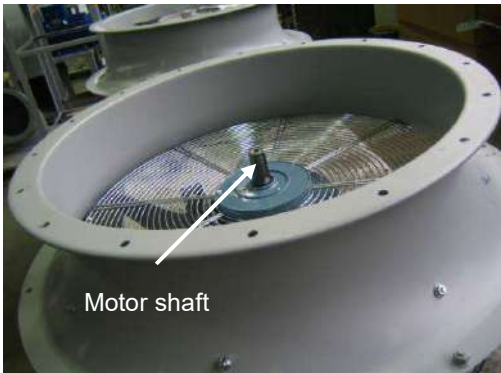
Blade angle adjustment for impellers with steel hubs.
